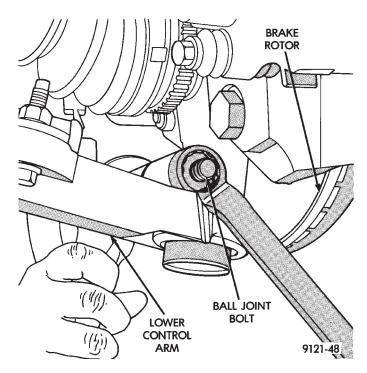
Remove Ball Joint Bolt (Right and Left Side)
